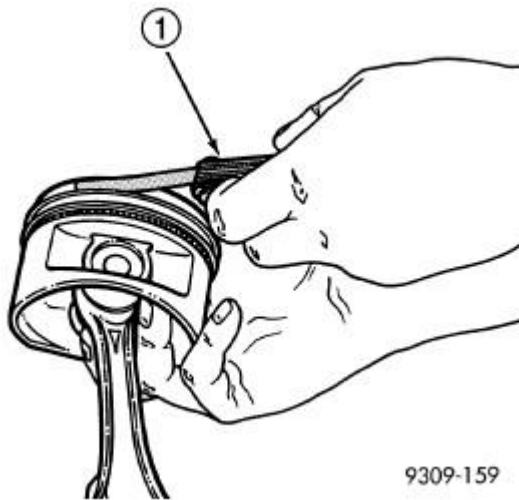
MEASURING PISTON RING SIDE CLEARANCE
